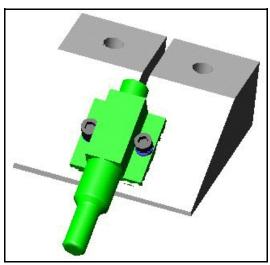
Uniaxial accelerometer on accelerometer mount
